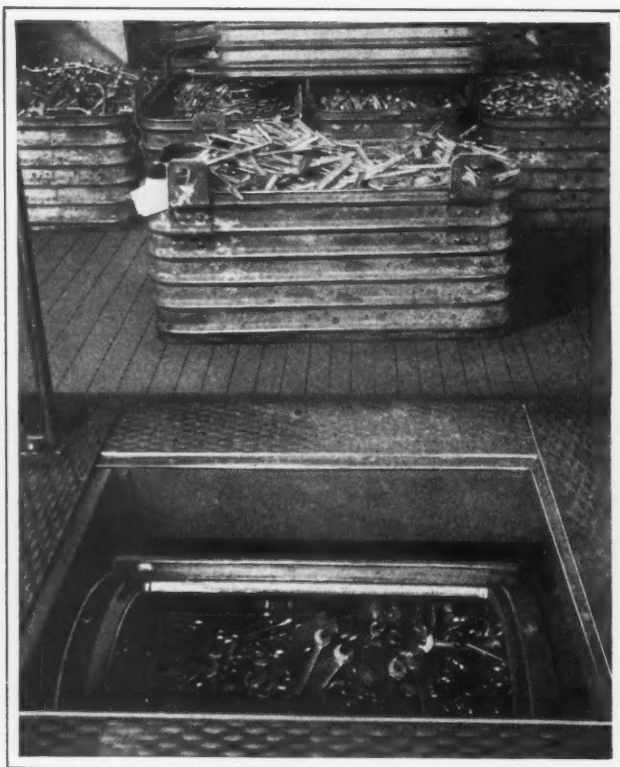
One of Four Tumbling Barrels Installed Beneath the Floor So as to Save Space
